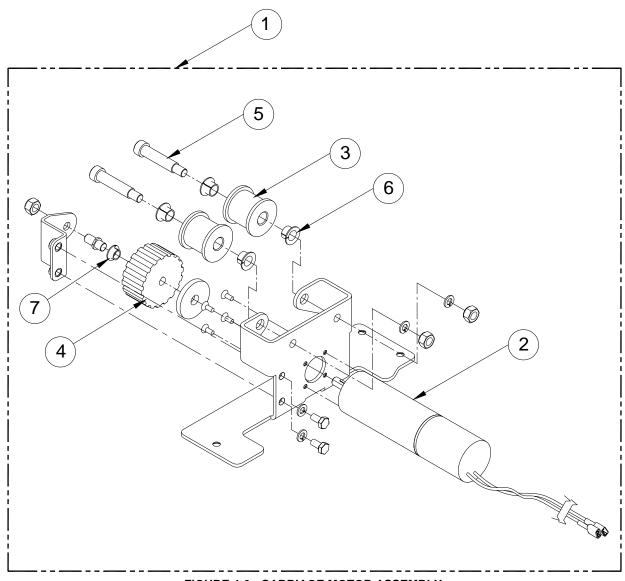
CARRIAGE MOTOR ASSEMBLY
